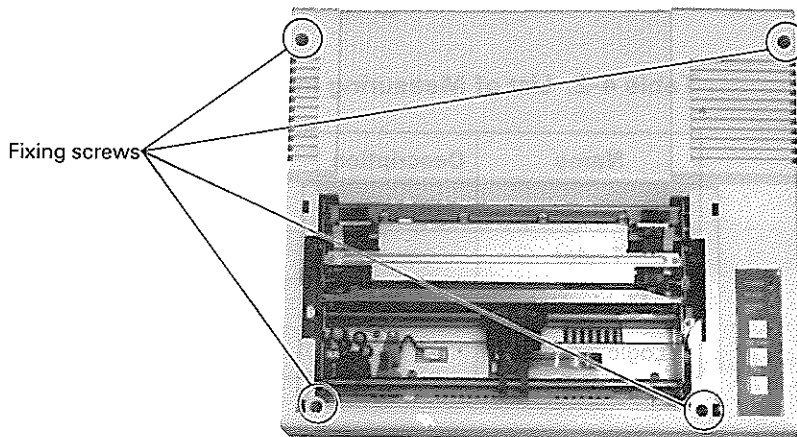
Locations of Upper Case Fixing Screws (FX-80+/FX-85)
